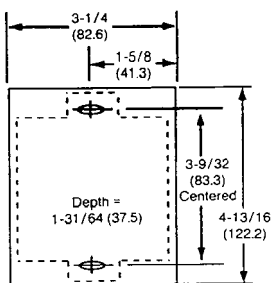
Mounting Dimensions NEMA Standard Mounting.
